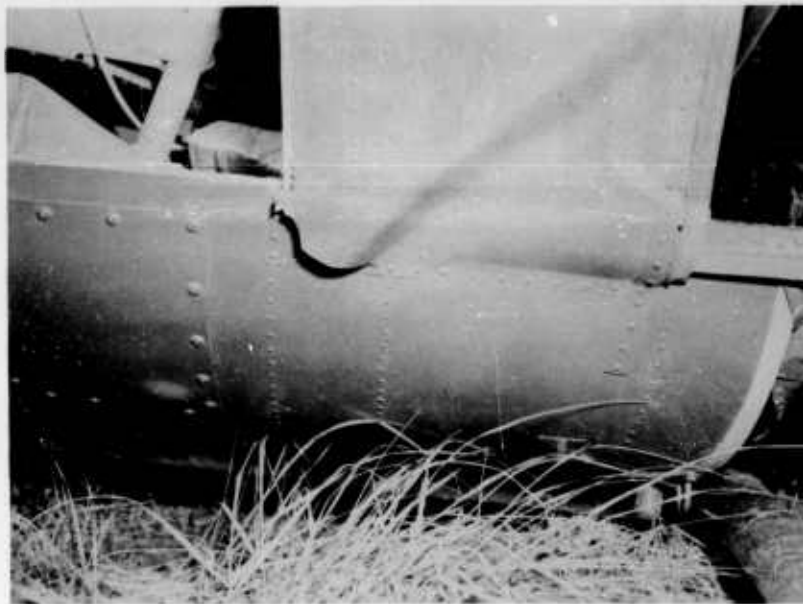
Side view showing distortion and impending separation of left vertical support at lower attachment.
